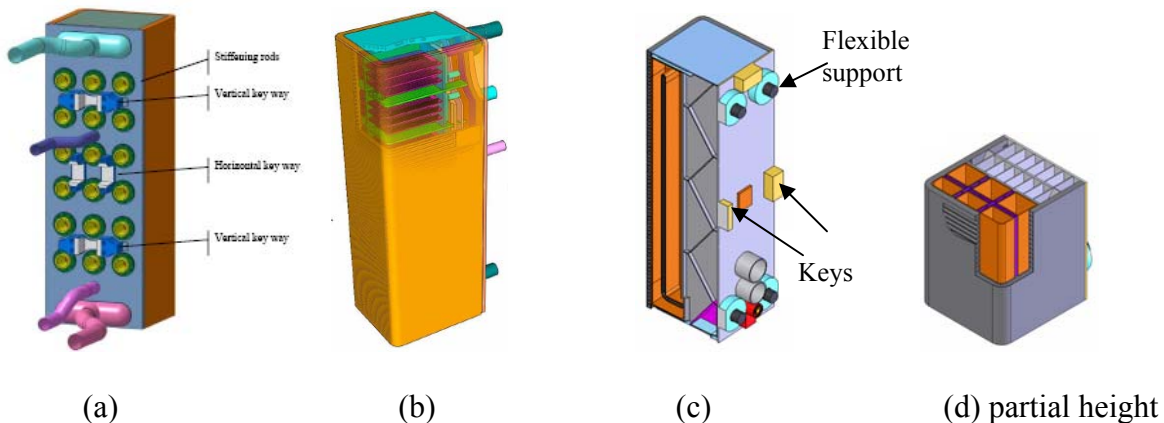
(a) and (b) EU-HCLL design, (c) and (d) US-DCLL design, both have the same external frontal dimensions, internally, both are filled with PbLi and high pressure He. (a) and (c) indicate back supports with keys and flexible attachments.
